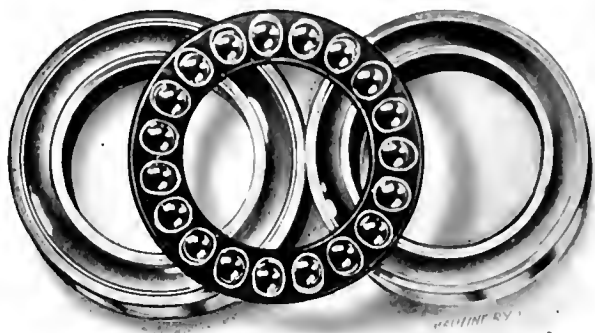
Upper and Lower Races for Thrust Bearing, and Balls with Retainer having Elliptical Hole
